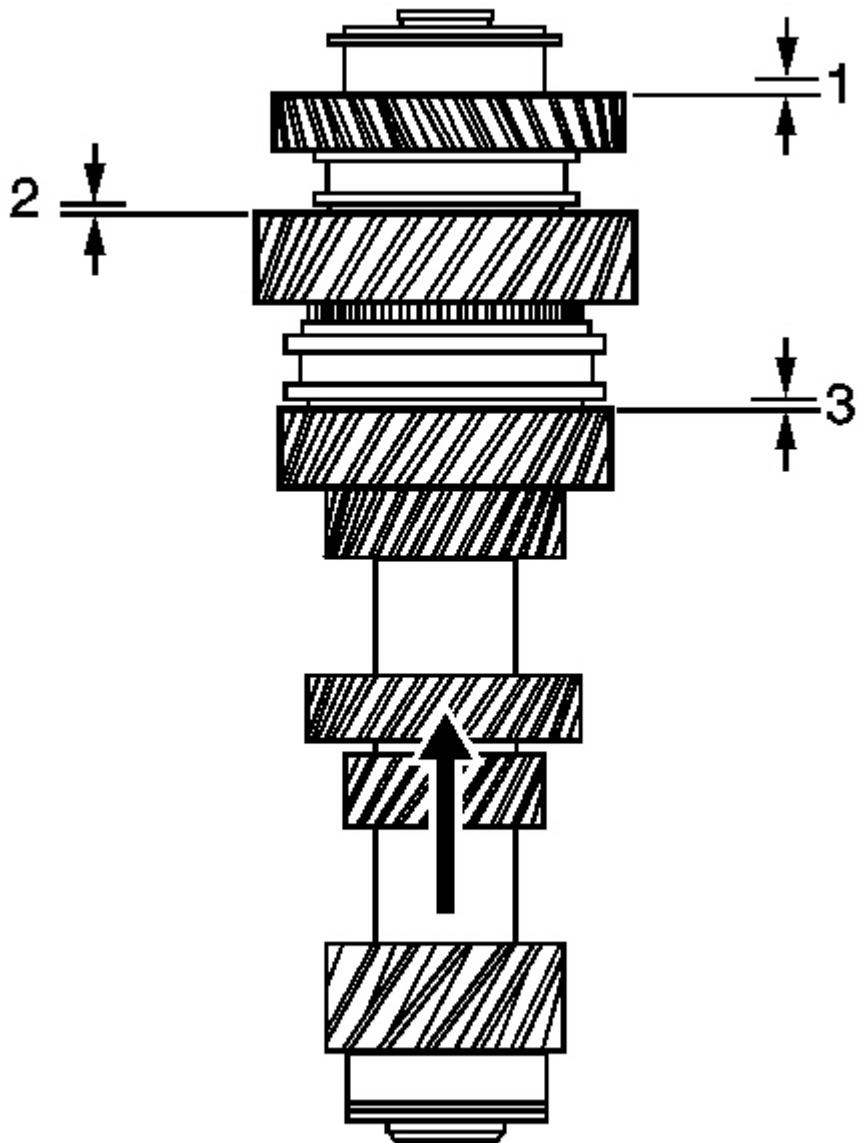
Inspecting 1st, 2nd & Reverse Gear Axial Clearance
